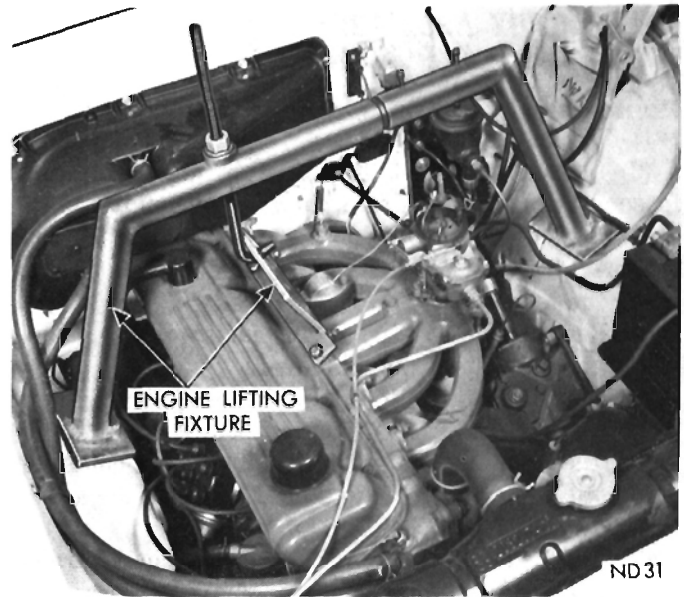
Engine Lifting Fixture (6 Cyl. Engine)
